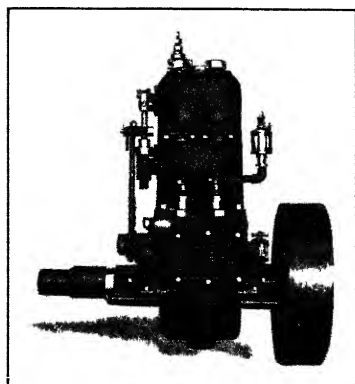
5-horse-power 4-cycle motor. Valve side.
